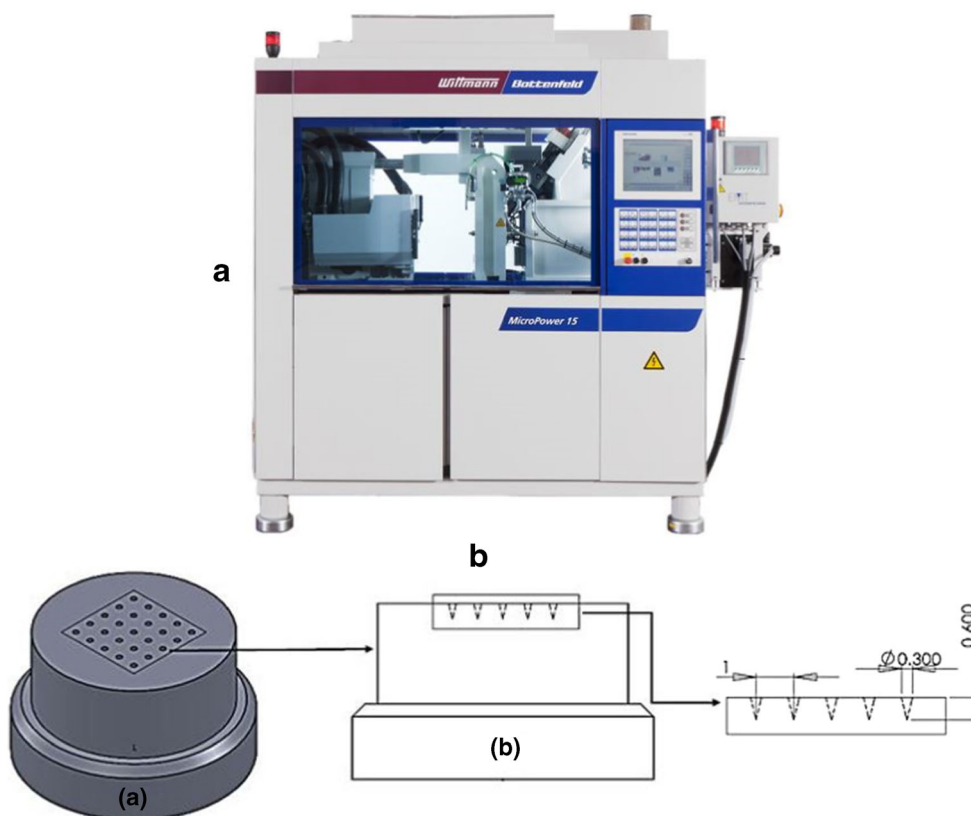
a Battenfeld micropower 15 moulding machine. b a 3D drawing of the microneedle insert and b dimensions of the insert created using Solid-works CAD software (dimensions are in mm)
